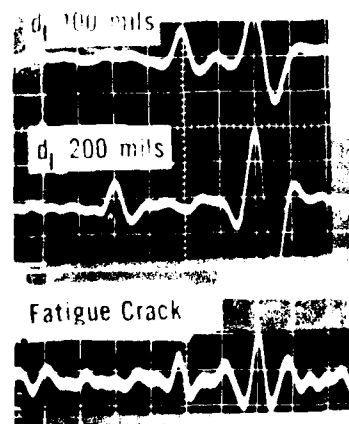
SPT-sizing of a laboratory-produced fatigue crack in a turbine rotor specimen breaking the inaccessible surface.
